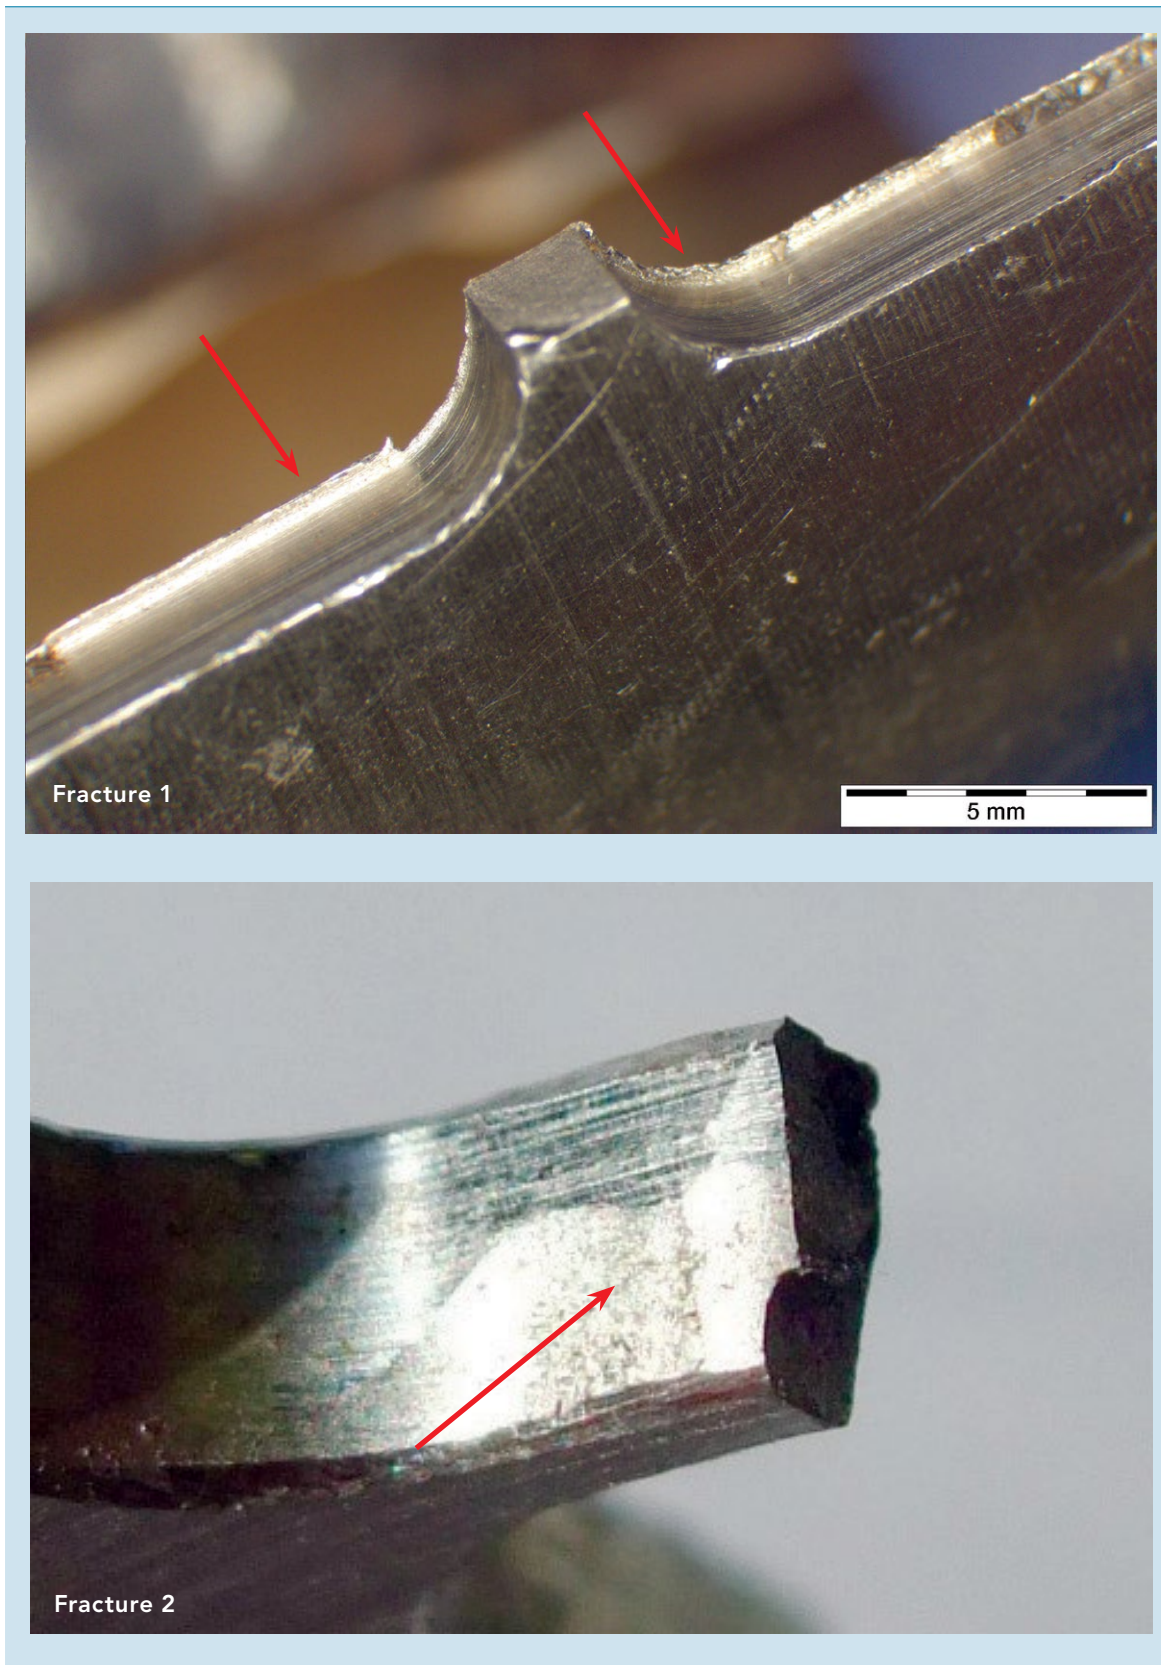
These photographs show the finishing defects demonstrated by the ring in switch 3B. Near break link 1, the defect concerns residual machining burrs, near break link 2 the defect concerns too much and too rough grinding. (Source: ProRail)
